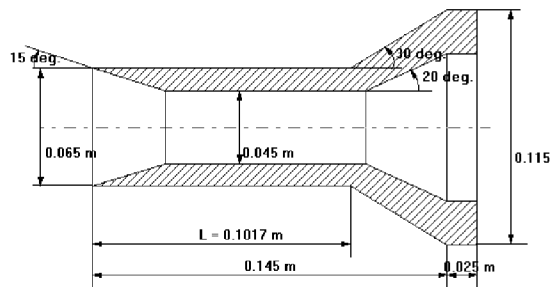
Geometrical definition of the cylinder-flare axisymmetric model
